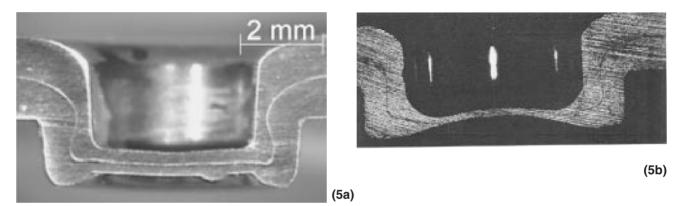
Geometry of clinched joints: (5a) using standard tools and (5b) using modified tools.
